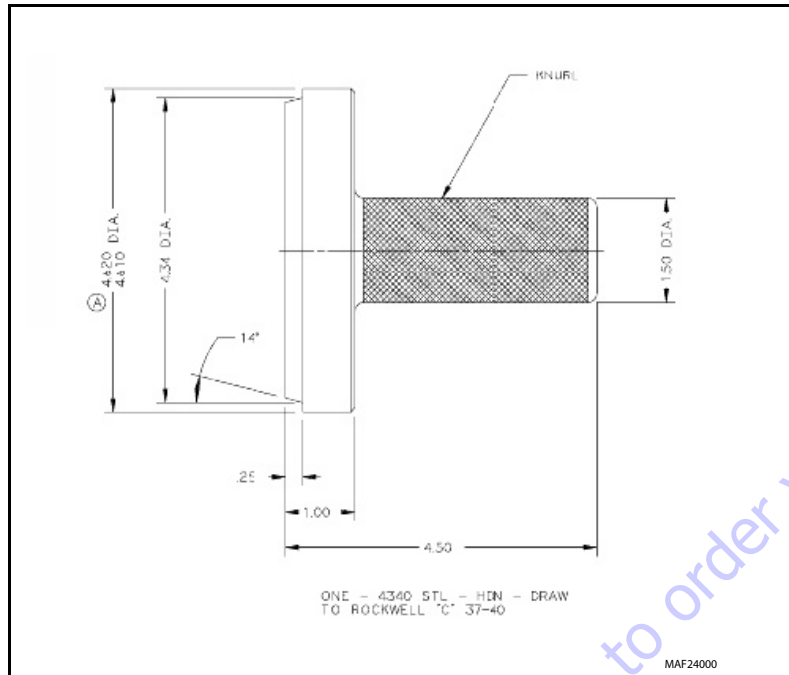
Bearing Cup Pressing Tool (T149013)
